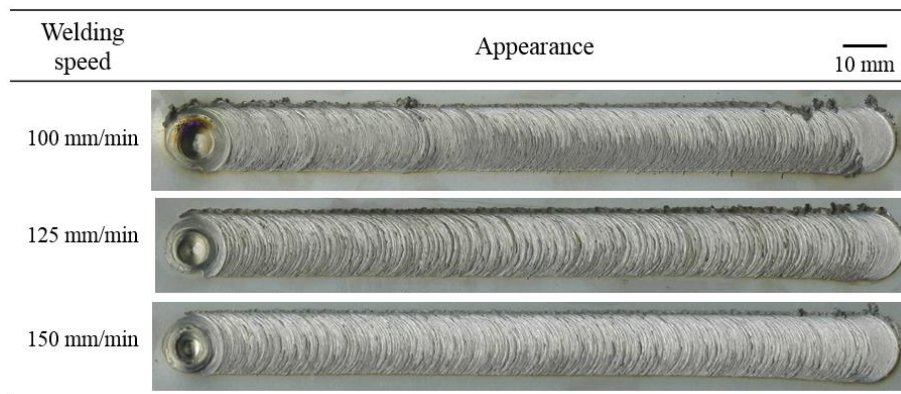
Appearance of the joints with different welding speeds of 100, 125 and 150 mm/min of 350 rpm and load 9.8 kN.
